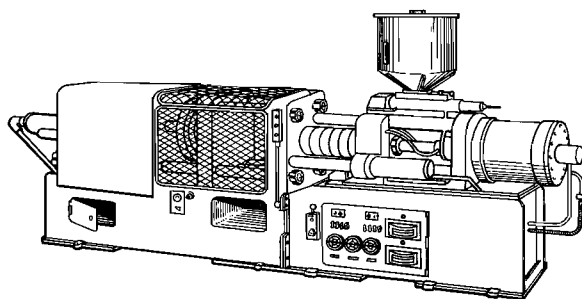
Injection mould for thermoplastics. Viscous resin is pressed by means of a plunger from a heated cylinder into a water-chilled mould, where it is cooled and removed. Thermo-setting moulding powders are also used in this method.
